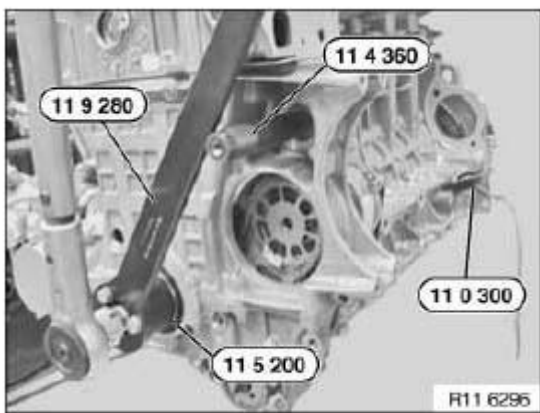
Identifying Special Tool (11 9 280), (11 5 200), (11 0 300) And (11 4 360)
